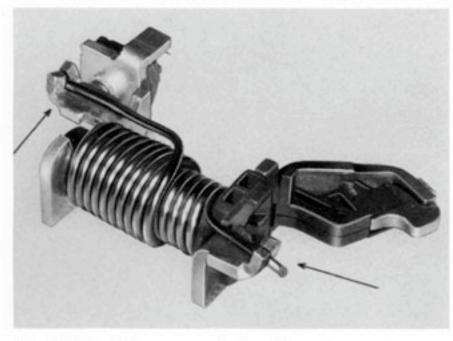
A. This is the magnet circuit breaker part assembled on the production line (see fig 6A / 6B / 7A). The two joints indicated by a flash are automatically soft soldered. The joints are massive copper parts and wire. It needs the high <spirflame> energy input to solder these joints within approximately 1 second.
